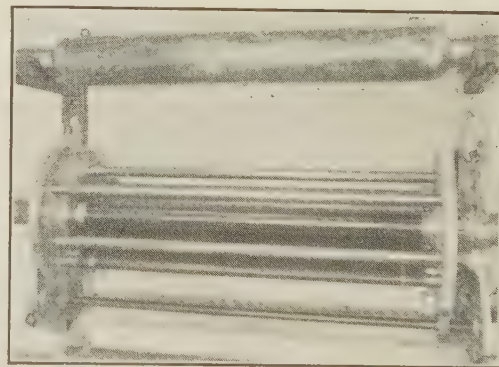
SHOWING CABLE AFTER STEPS HAVE BEEN FILLED WITH PAPER AND FULL-WIDTH PAPER WRAPPED ON.
